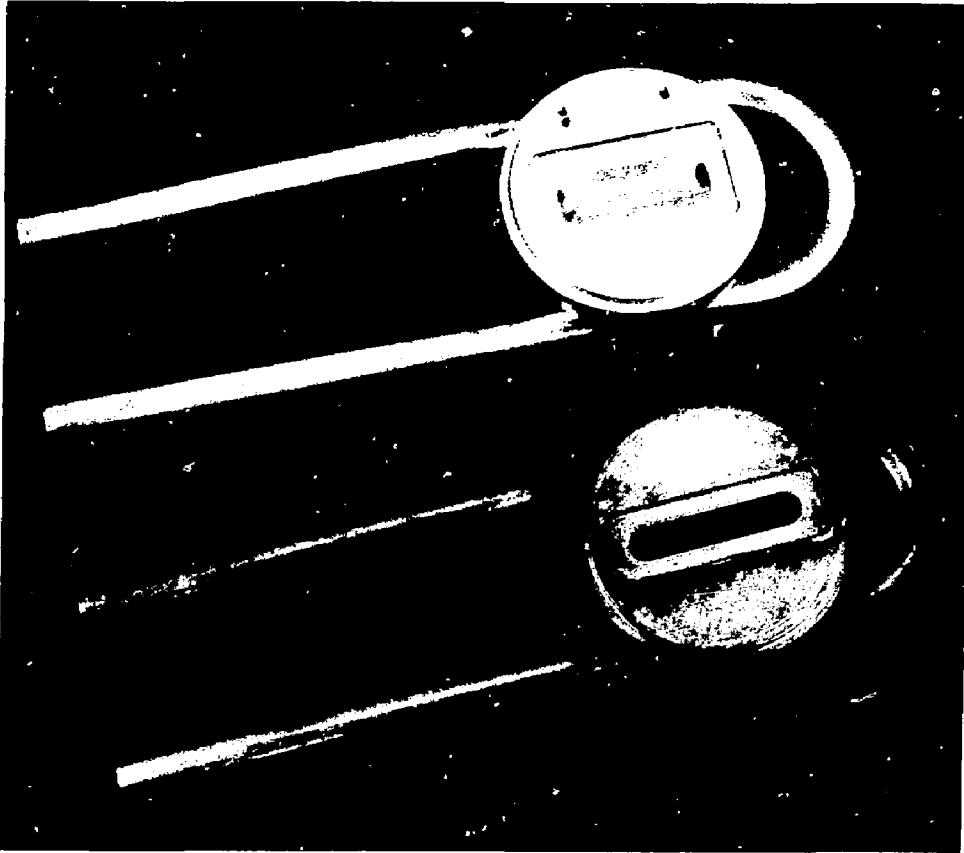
Beryllium window assemblies consisting of 0.254-mm beryllium foil vacuum brazed into a copper heat sink that has a 5-mm stainless steel tube soldered into its perimeter groove: (a) 10-mm by 25-mm aperture shown with Be foil mounted, (b) 5-mm by 25-mm aperture with Be foil removed.
